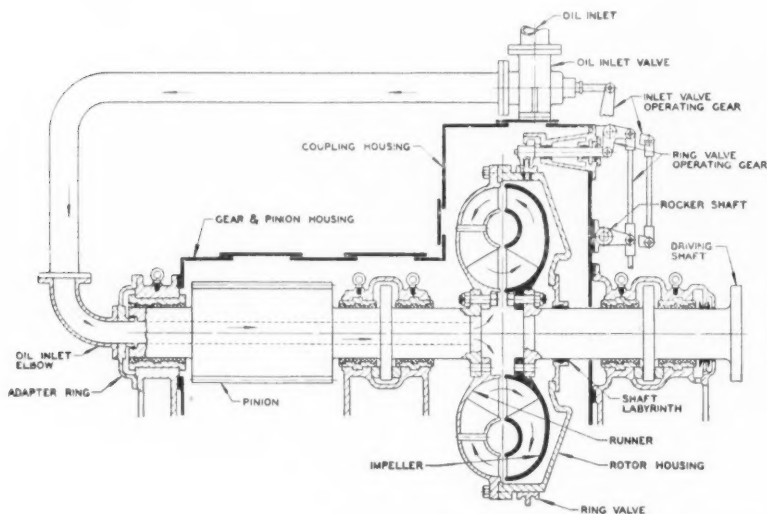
Showing the type "K" Vulcan hydraulic coupling. Note the tie-up to the gear assembly.
